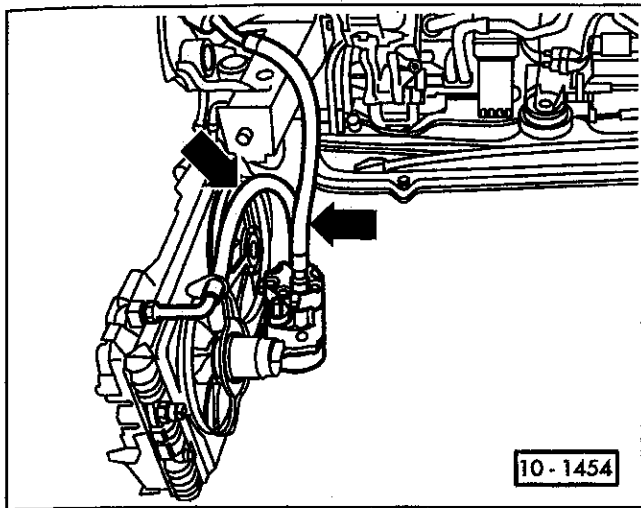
Radiator assembly on cars with A/C shown positioned in front of engine.
